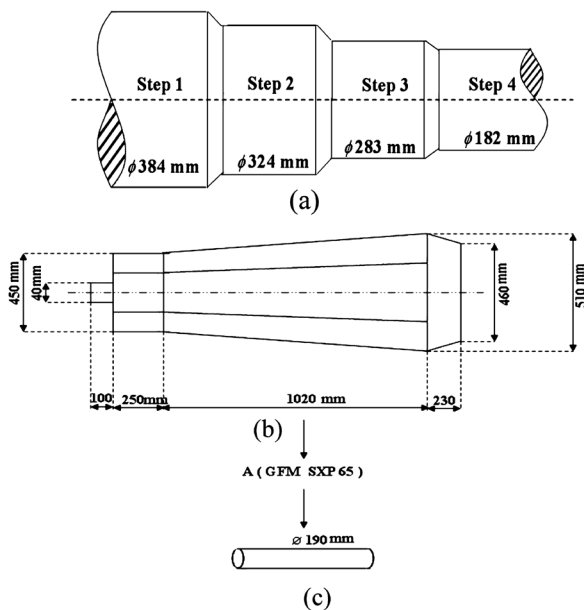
The schematic representation of hot working process: (a) radial and edge hot-forging condition; (b) the initial sample; (c) the final hot-forged sample.
